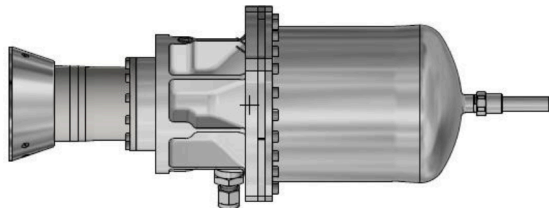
FISC bolted joint (and hermetic) prototype design.
